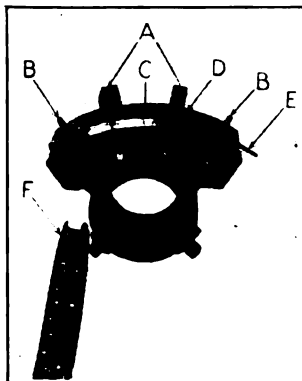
DETAILS OF SPOKE-HOLE DIE
